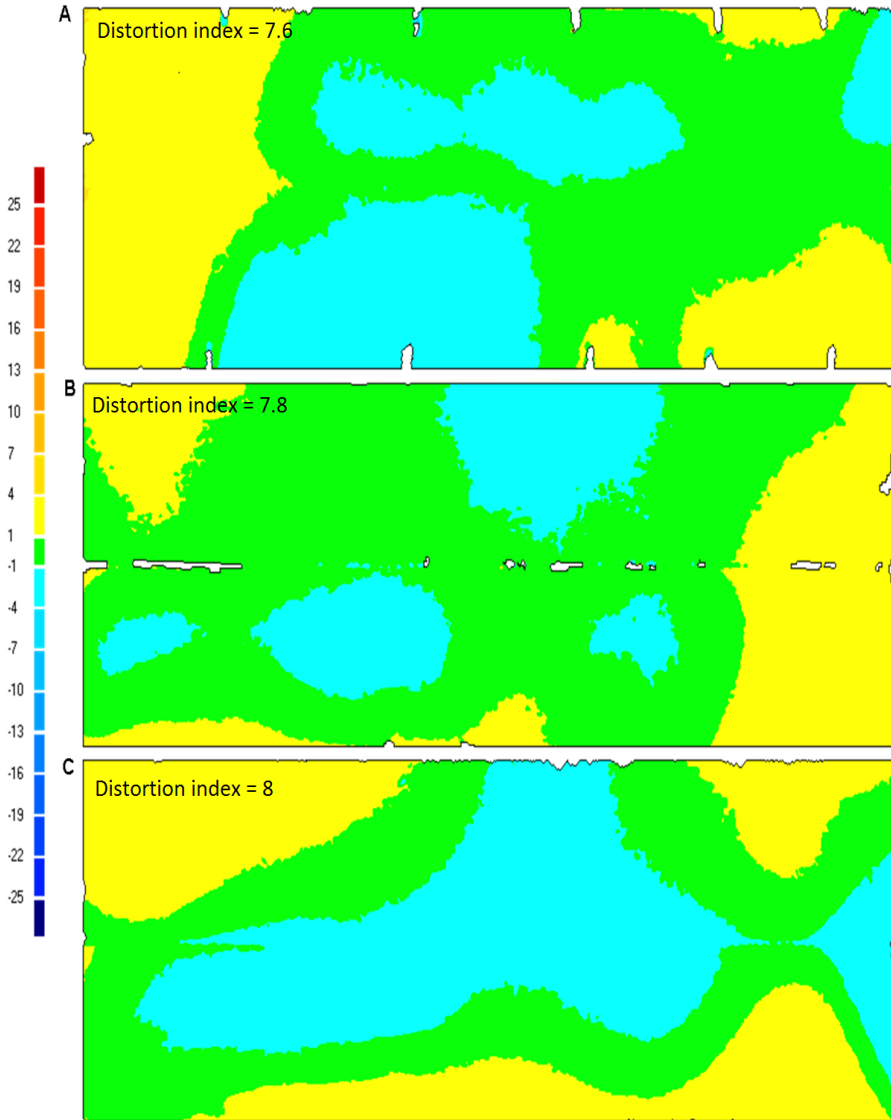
The out-of-plane deformation of AH36 plate for welding with side heating in test 5: (a) the initial deformation after tack welding, (b) the out-of-plane deformation after side heating during welding of the first pass and (c) the final out-of-plane deformation after side heating during welding of the second pass. The scale is -25 mm to +25mm.
